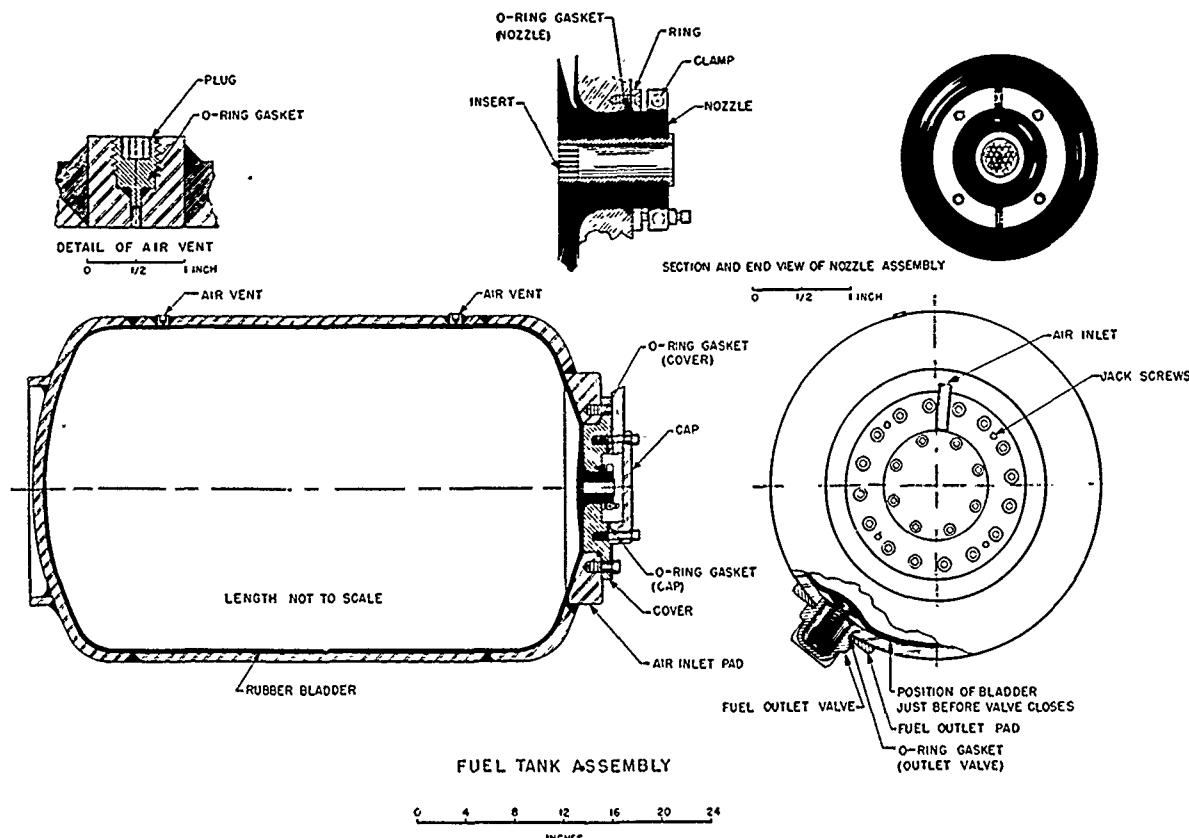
Cutaway of fuel-tank assembly for E13R1-13R2 flame thrower.
